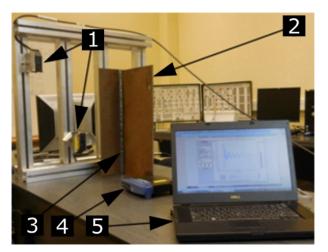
Photograph of actual test stand for NDT of welded plates with the use of laser displacement sensors in LAN, where: 1 – laser displacement sensors, 2 – welded plate, 3 – weld, 4 – router, computer with web browser
